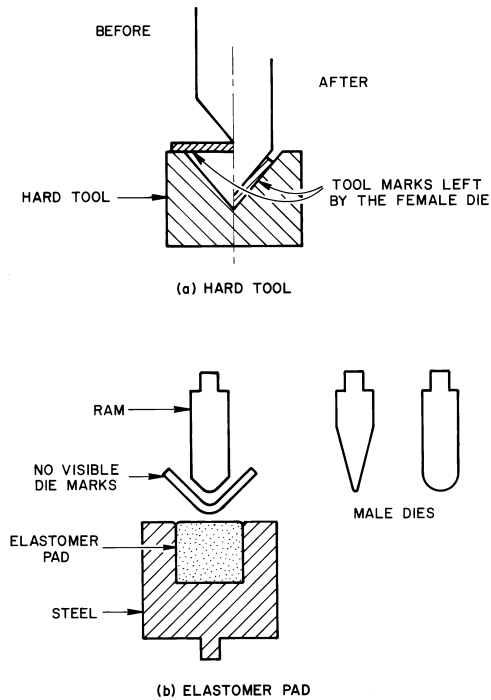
Brake press: (a) hard tool and (b) elastomer pad.
